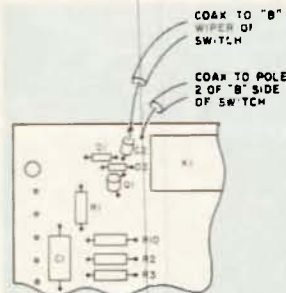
Corner of top side of control board showing location of C2 and coax cable connections.
